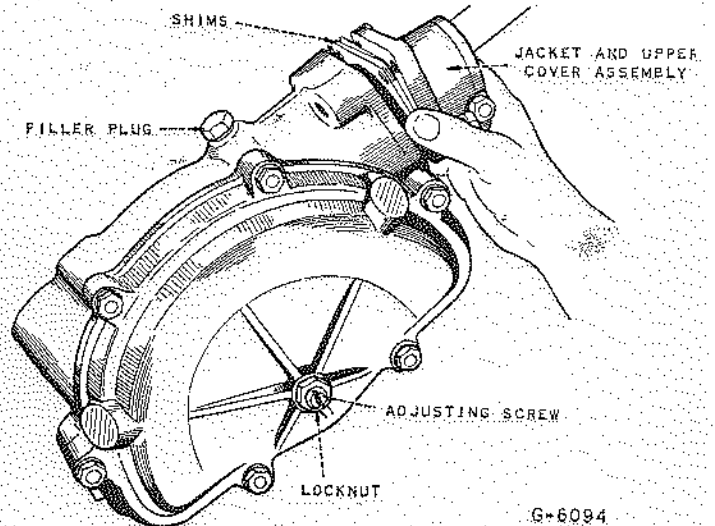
Showing location of Shims under Upper Housing Cover used to adjust end play on Cam
